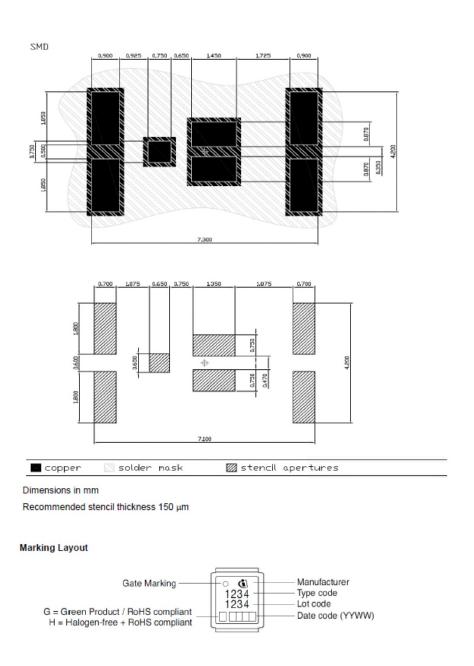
Outline Boardpads and apertures CanPAK MX, dimensions in mm
